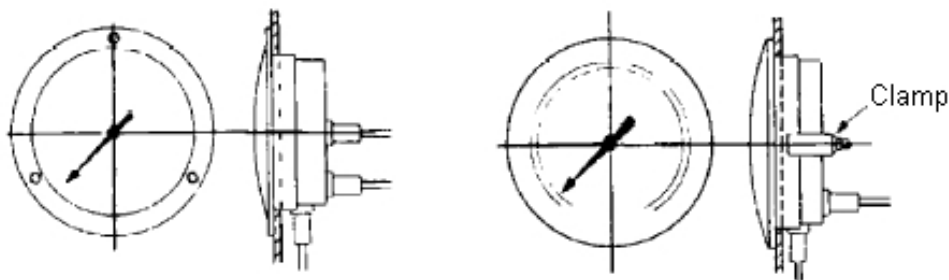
RIGID STEM MOUNTING (BACK, BOTTOM, SIDE OR TOP CAPILLARY ENTRY)
